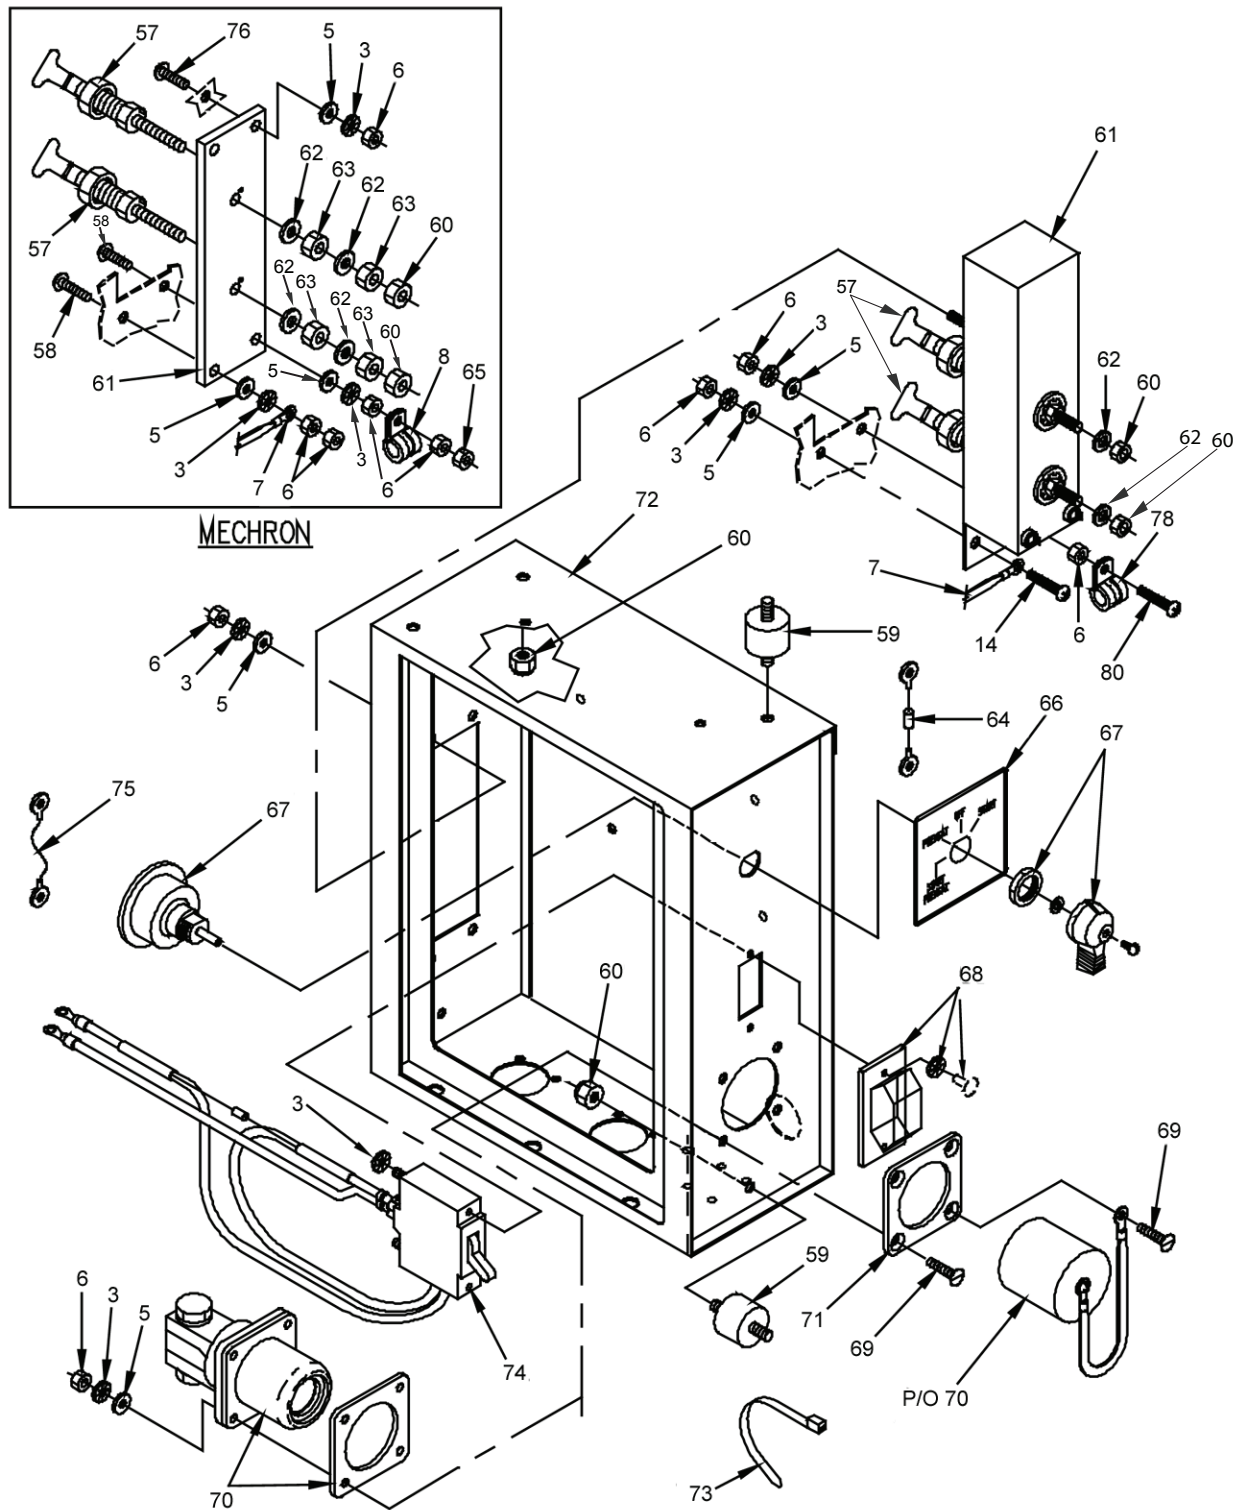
Control Panel Assembly (MEP-531A) (Sheet 3 of 3).
